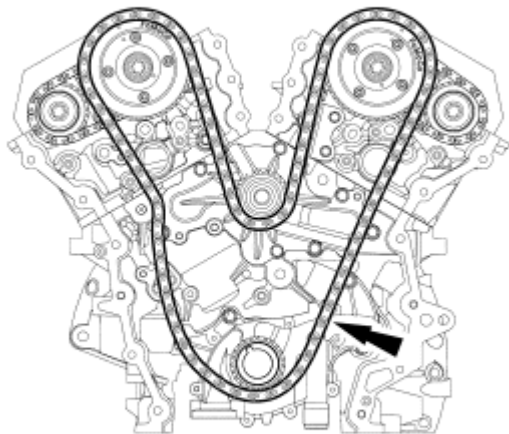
Locating Lower LH Primary Timing Chain Guide & Bolts
